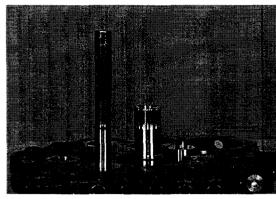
Support spacer plate and press reverse idler shaft into position and tight against locating ring.
